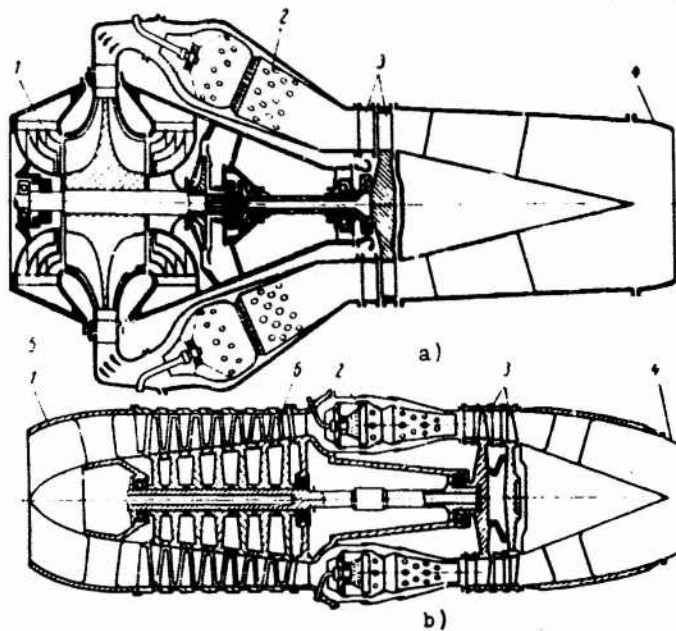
Diagram of arrangement of combustion chambers on a GTD: a) with centrifugal compressor; b) with axial-flow compressor; 1 - intake; 2 - combustion chamber; 3 - turbine; 4 - outlet nozzle; 5 - centrifugal compressor; 6 - axial-flow compressor.
